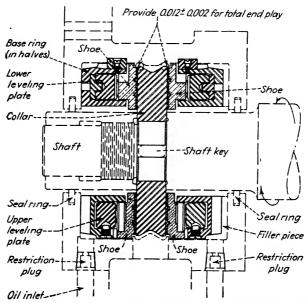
Seven-inch double-equalizing six-shoe thrust bearing. (Courtesy of Kingsbury Machine Works, Inc.)
